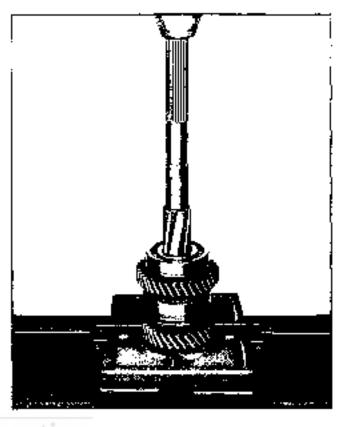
Fressing Mainshaft from First and Second Speed Greans
